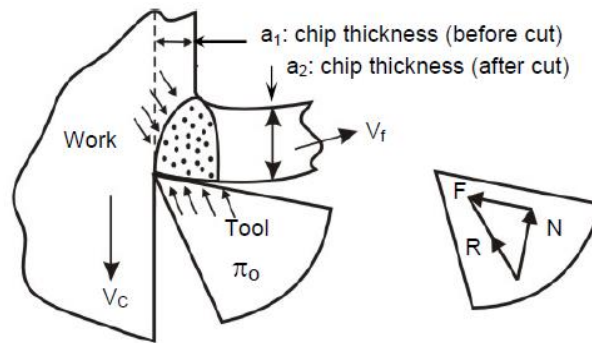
Compression of work material (layer) ahead of the tooltip [37].
